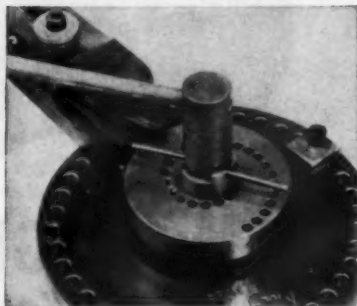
Set-up for coiling a spring from a straight bar. Coiling tool is shown just starting to form spring. By changing diameter and slope of mandrel, coil diameter and pitch can be made any value desired.
